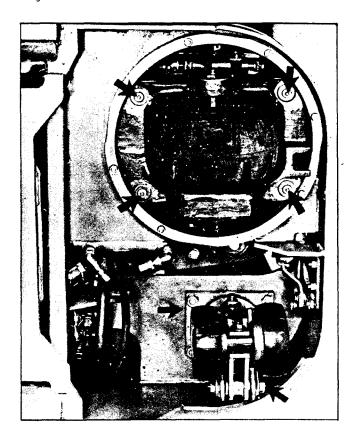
Caster, Radial Roller and Wheel Shaft, Lubricate all grease fittings per Lube Chart. Lubricate brake linkage only, DO NOT LUBRICATE BRAKE, with S.A.E. number 20 engine oil every 100 operating hours.
